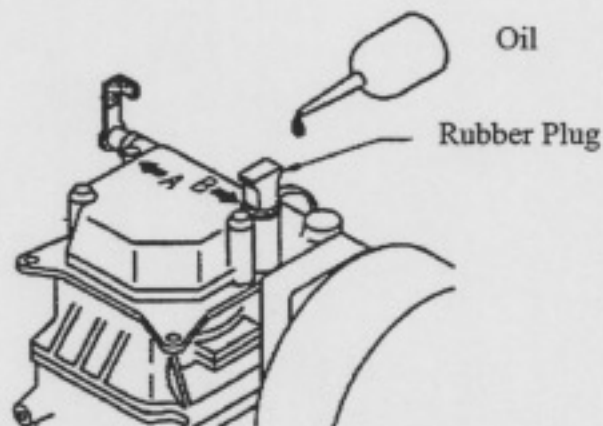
Adding Oil – Cylinder Head Cover Opening
